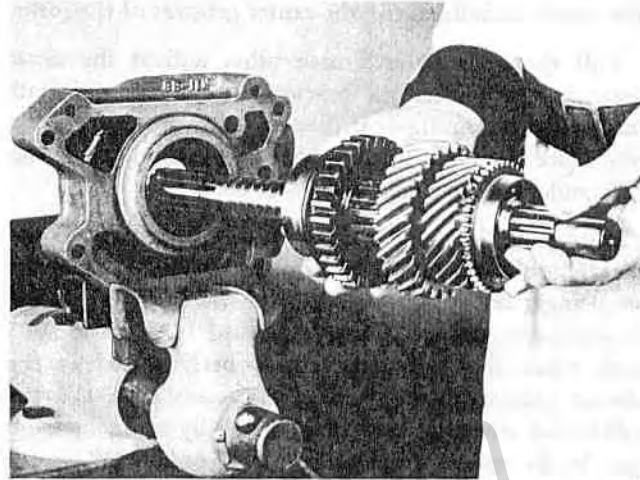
Installing the Main Driving Shaft Into the Overdrive Adapter Plate
